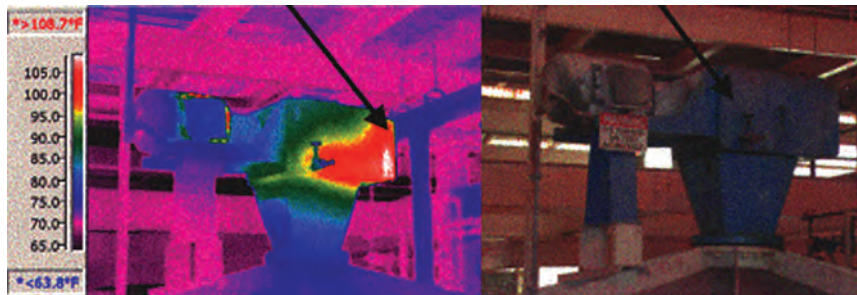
Possible gearbox problem indicated by white area defined by arrow. Design drawings of gearbox should be examined to define possible cause of elevated temperatures.
